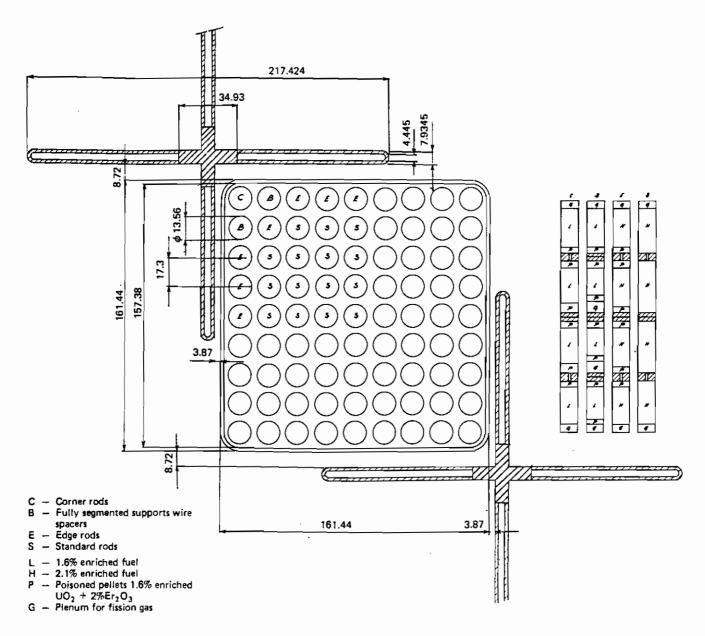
Horizontal cross-section of the Garigliano reactor fuel assembly (All dimensions are given in mm)
